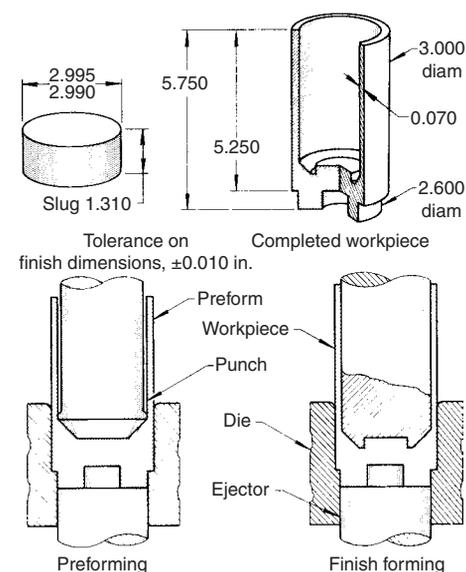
Aluminum alloy 1100-O housing that was extruded in two operations because of an internal boss. Dimensions given in inches
